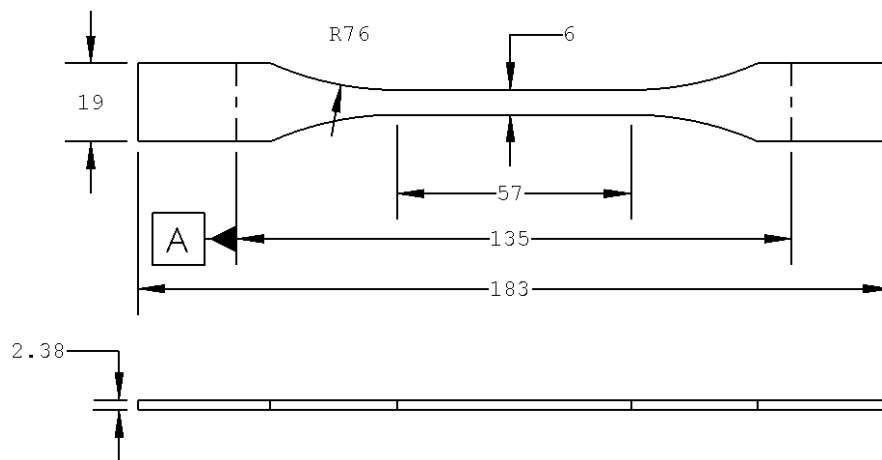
ASTM D638-II Nominal dimensions (mm).
